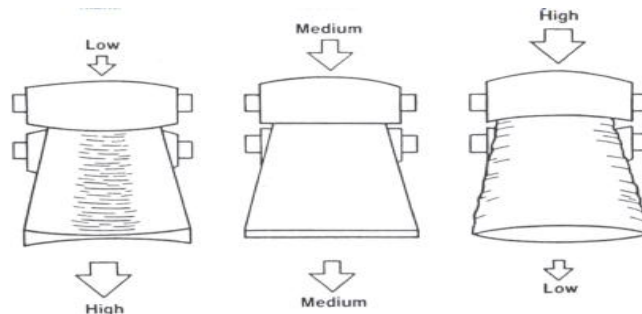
During weld passage improper skin-pass mill (SPM) settings can lead to defects
